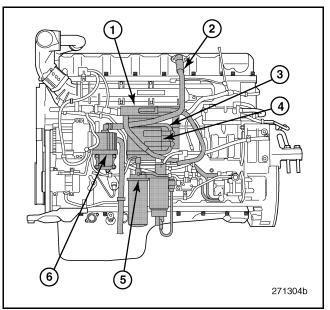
Components to be Removed Before Mounting on a Repair Stand — Conventional Chassis, Typical
